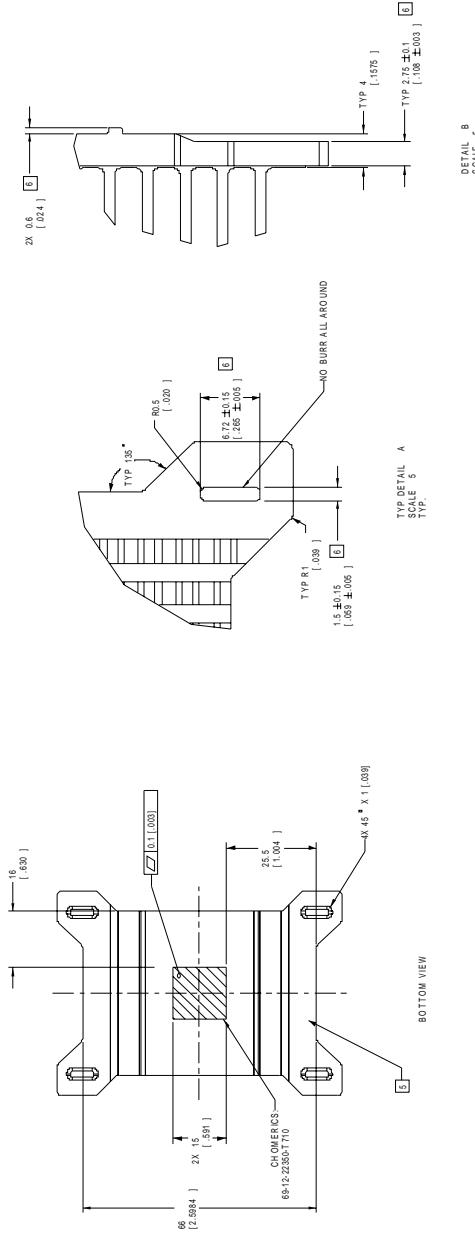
(G)MCH Heatsink for ATX Platforms – Anchor
